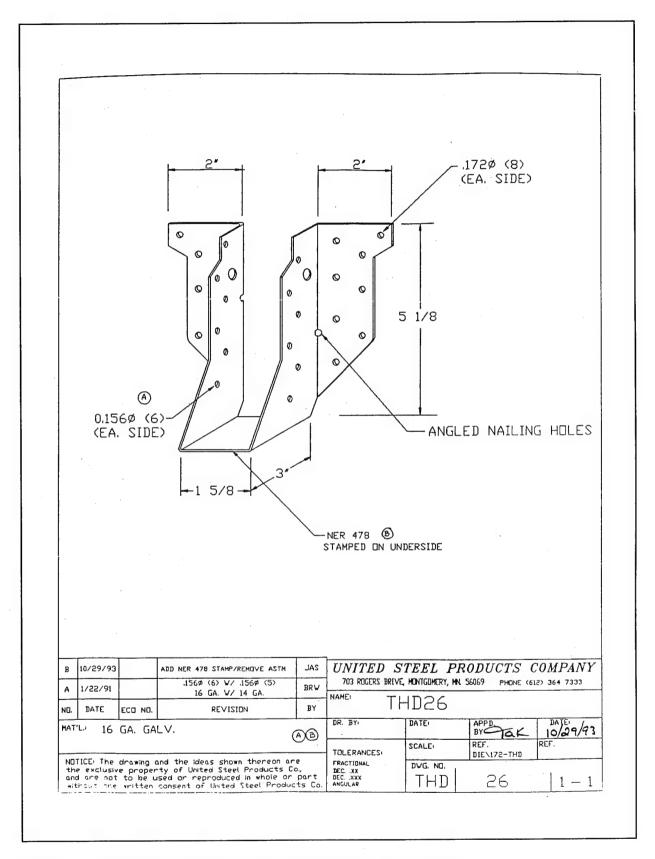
Engineering drawing for Kant-Sag THD26 wood connector
